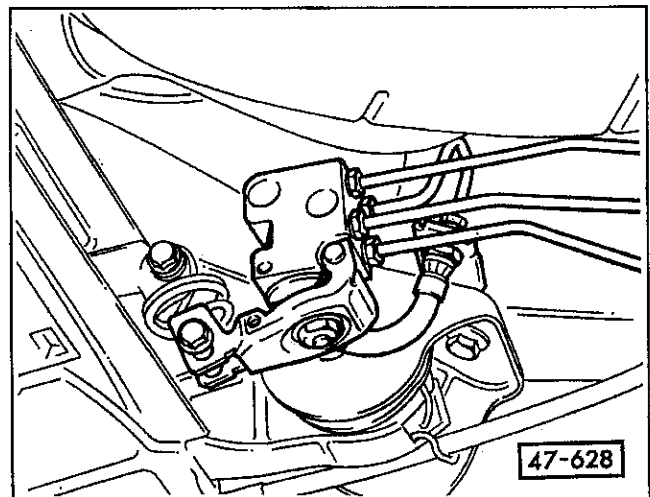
Brake pressure regulator mounted in front of rear axle beam.
